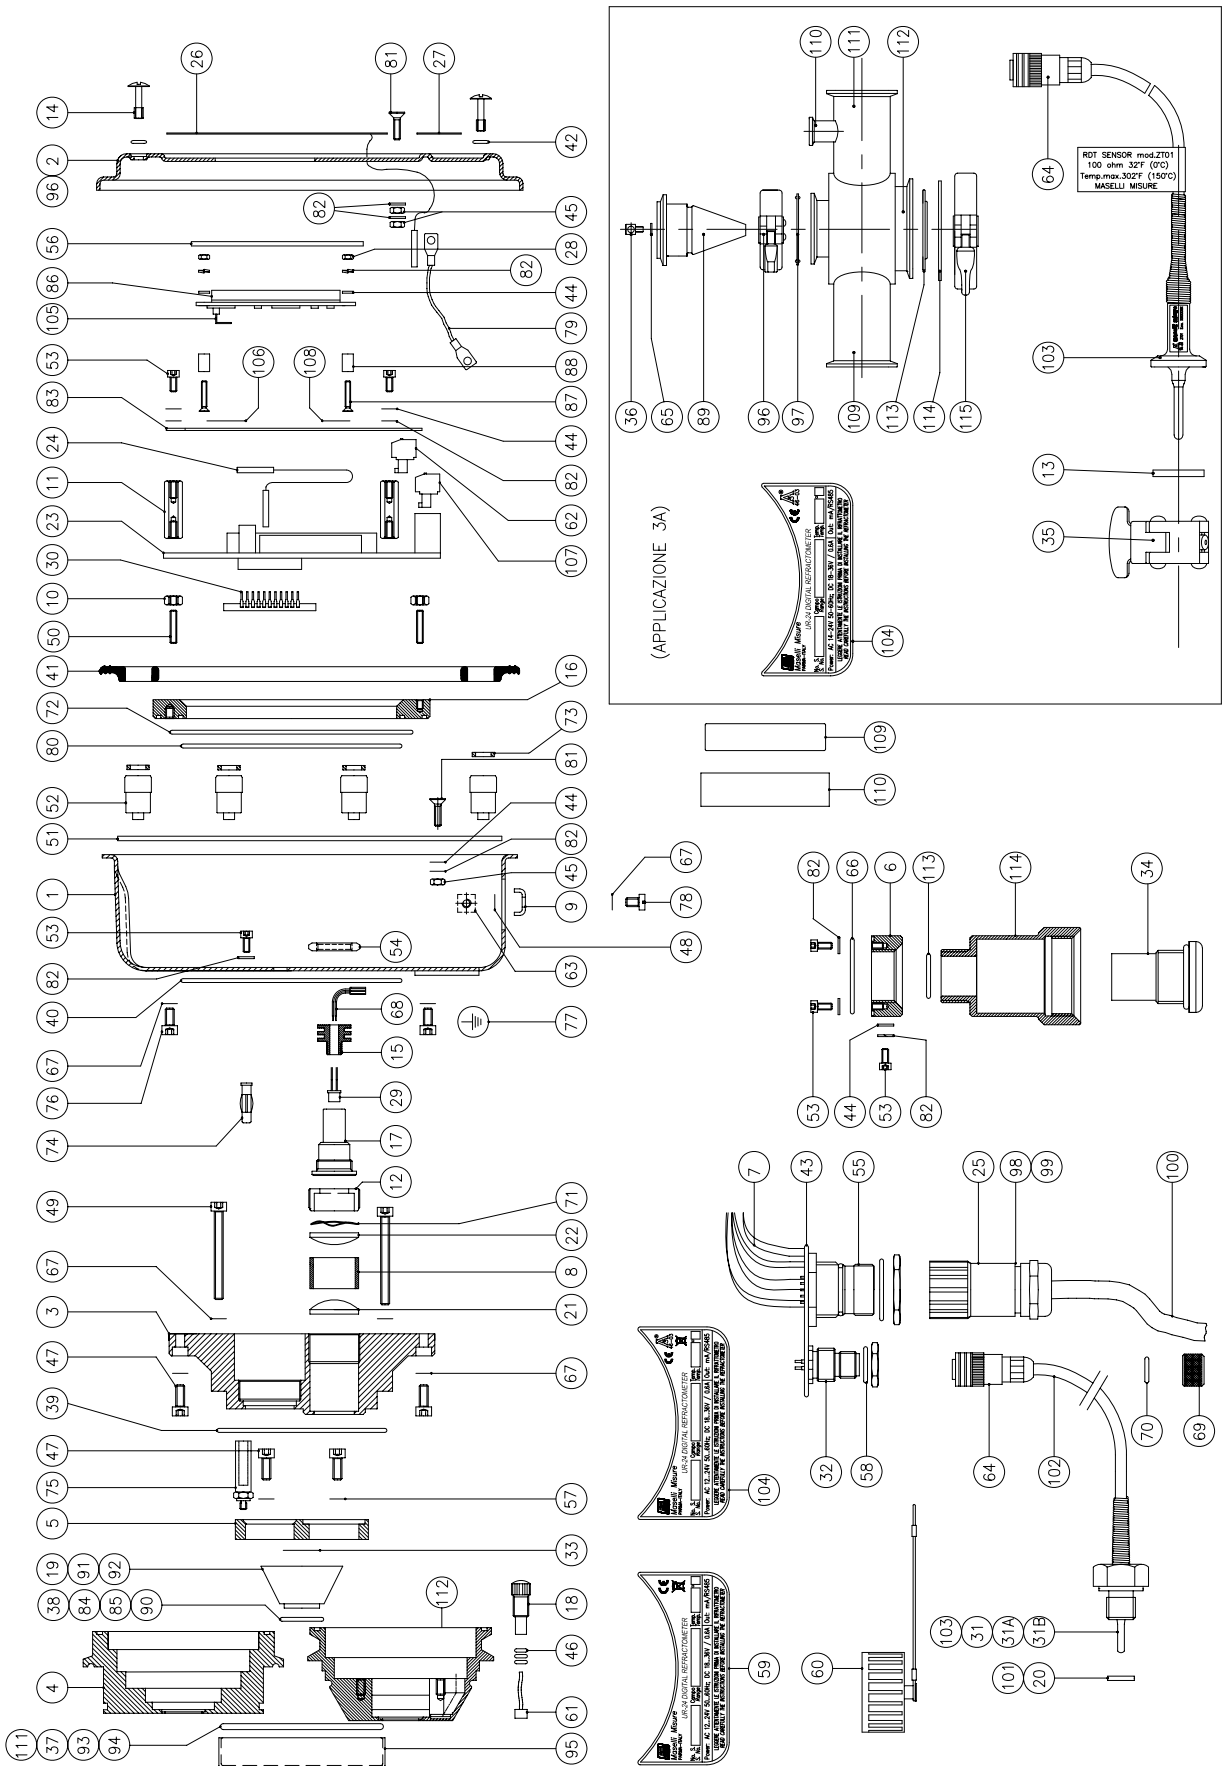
a – Exploded view of UR-24 Digital Refractometer
